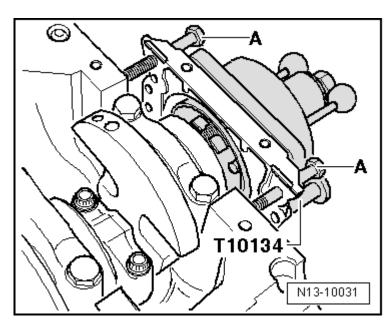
Identifying Assembly Tool T10134 Secured Onto Crankshaft Flange Using Socket Head Hex Bolts
